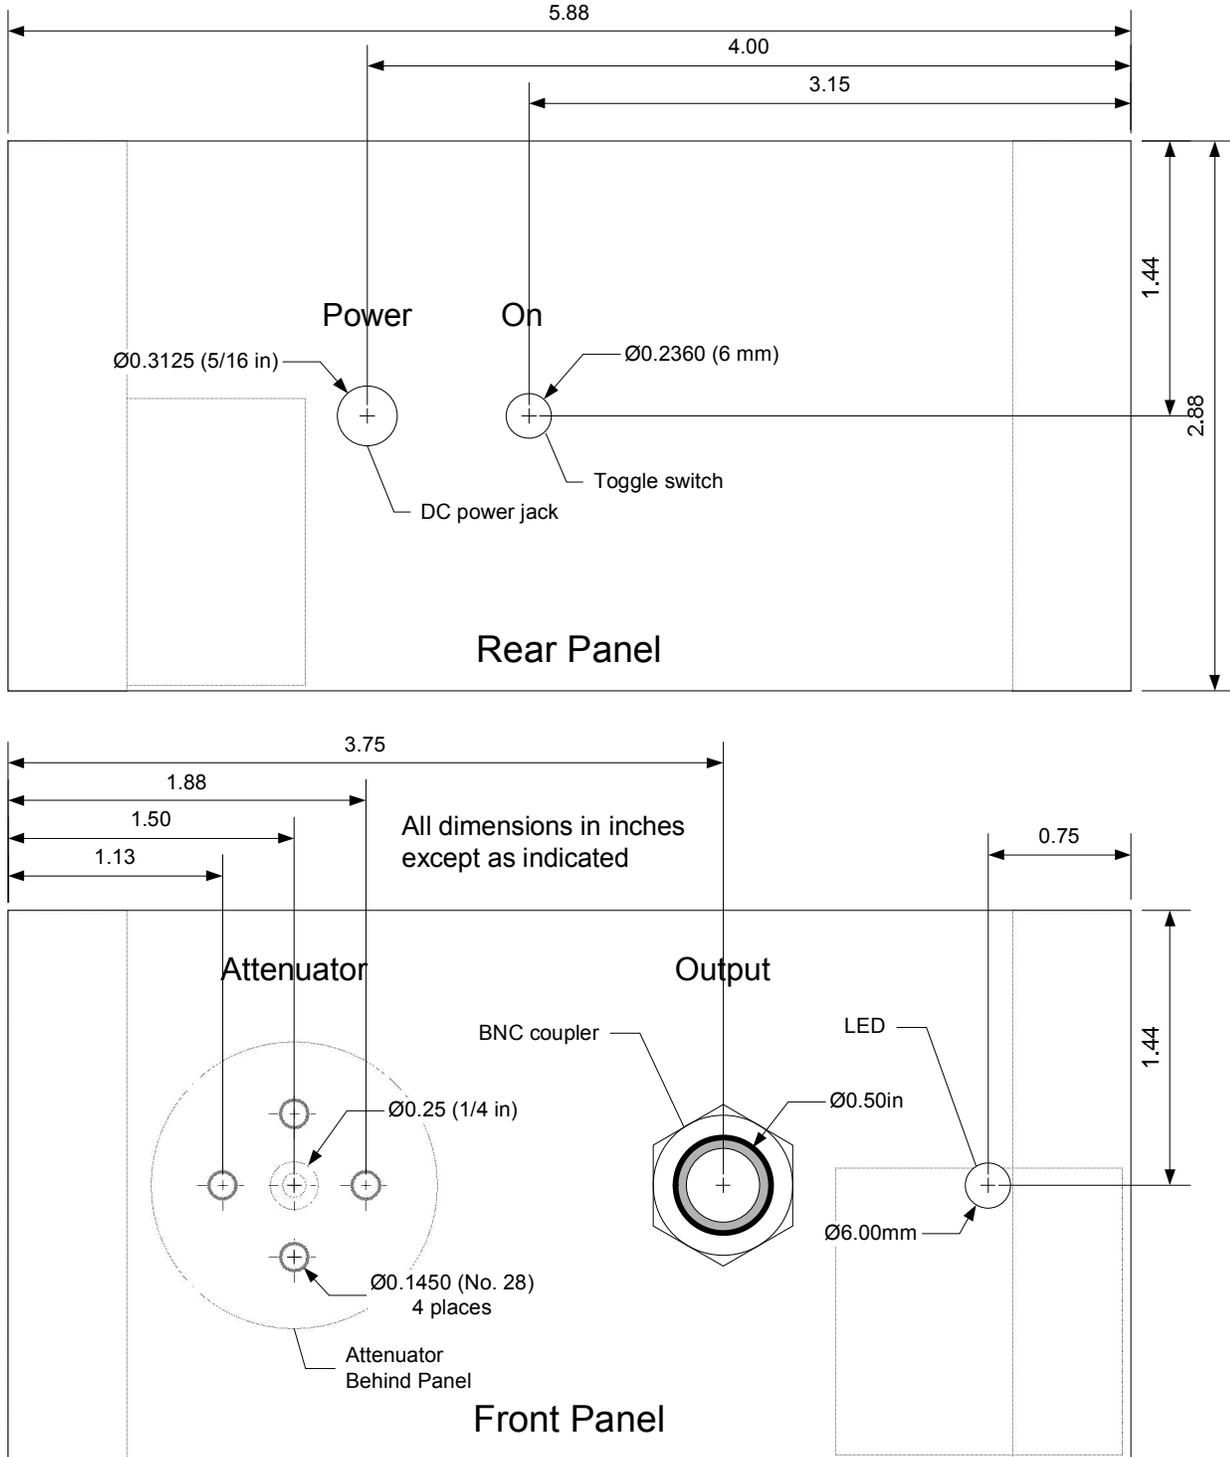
~ Front and rear panel layouts for the HOT-1 Package. Dimensions shown correspond to the items listed in the bill of materials.
